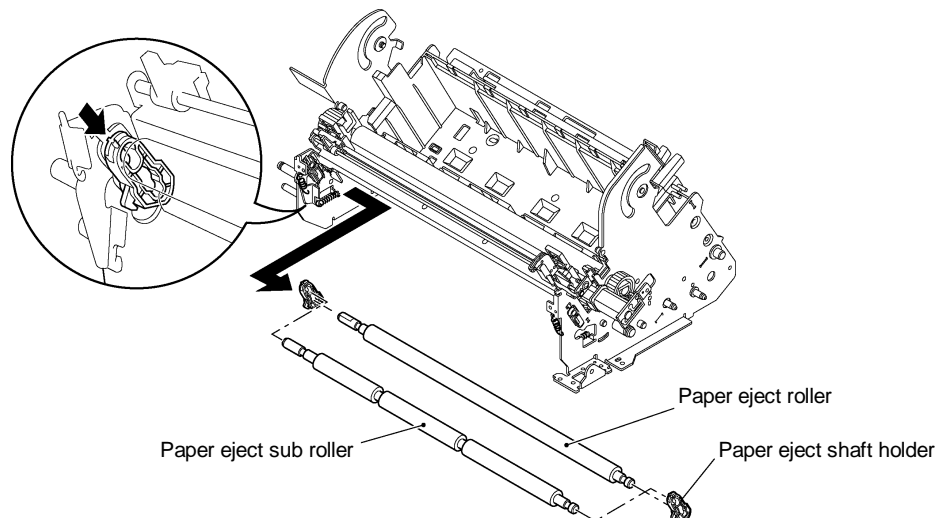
Removing the Paper Eject Roller Unit 1
